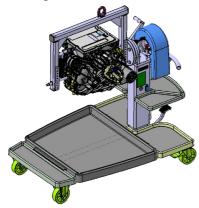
Holder and electric motor on the VAS 6095 motor and gearbox holder
